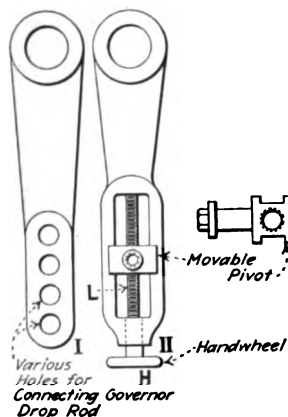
Showing adjustable governor levers. (Lever, I, is adjusted by changing the rod pivot from one hole to another. Lever II is adjusted by means of a hand wheel, H, and lead screw, L.)
